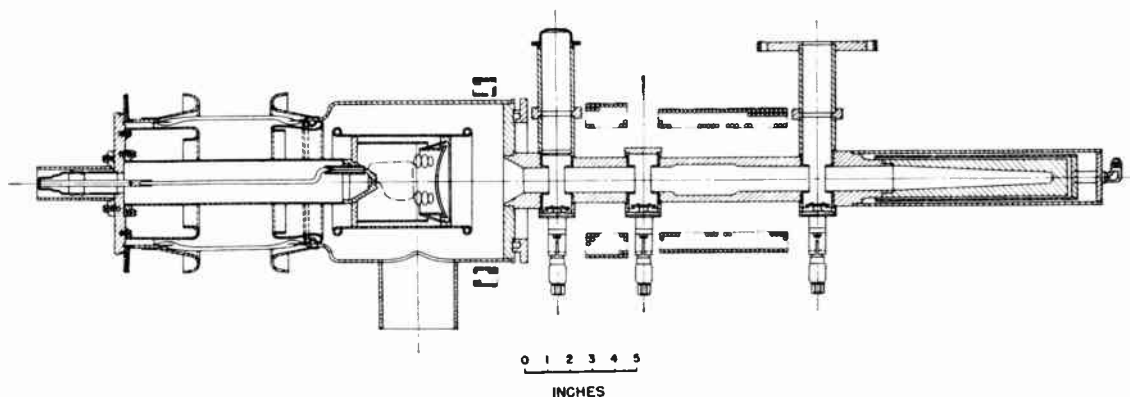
Simplified assembly drawing of 30-megw accelerator klystron.
